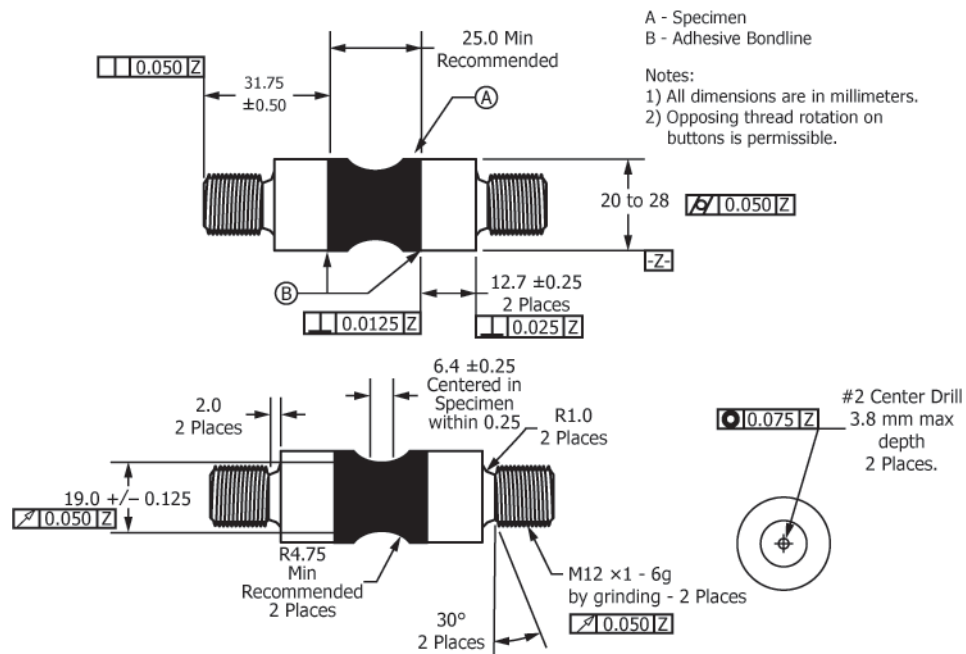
Drawing of End Tabs and "Spool" Specimen Assembly (SI units)
